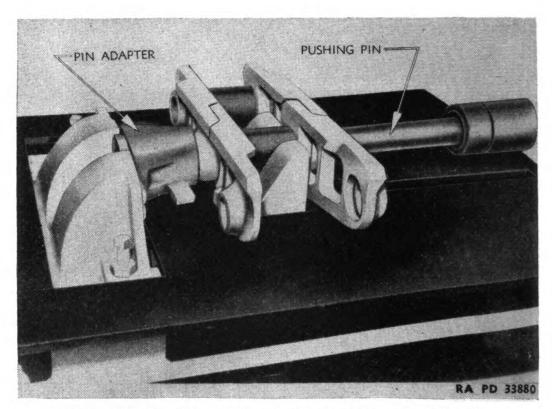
Pressing out track pins using pin adapter and pushing pin.
